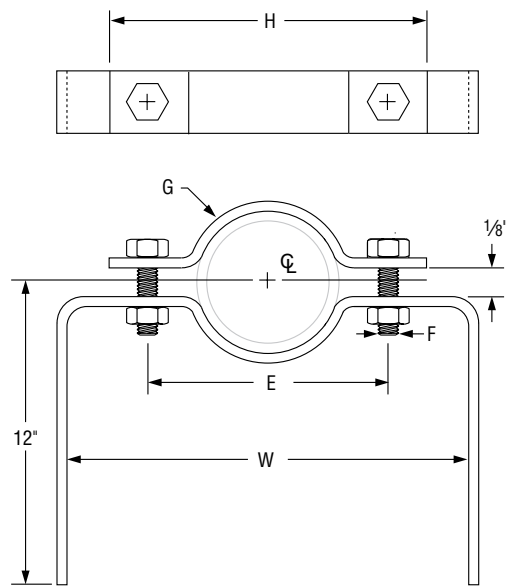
WEIGHT (LBS) • DIMENSIONS (IN)
